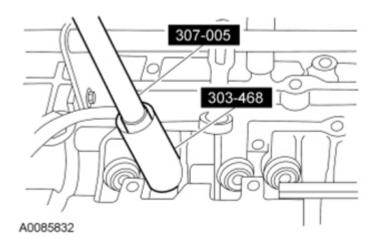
Remove/Install Valve Spring And Valve Spring Retainer Using Valve Spring Compressors
